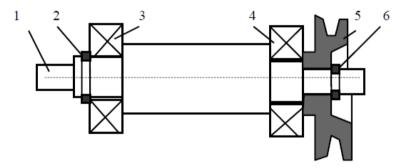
Drive mechanism. 1 - shaft, 2,6 - retaining rings, 3,4 - bearings, 5 - pulley
